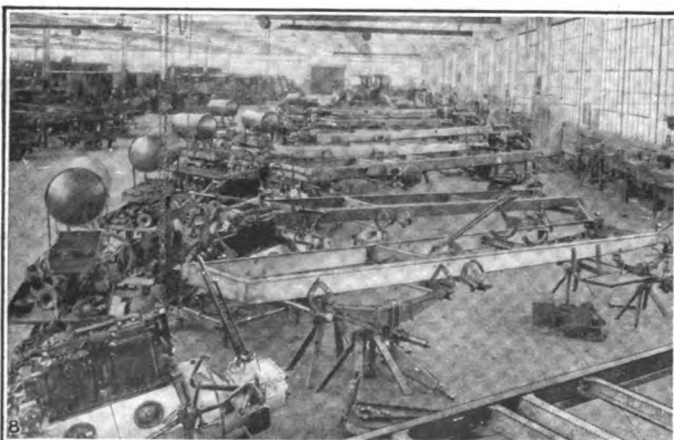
THE ASSEMBLY LINE. FIG. 9. PUTTING THE TRUCK TOGETHER
